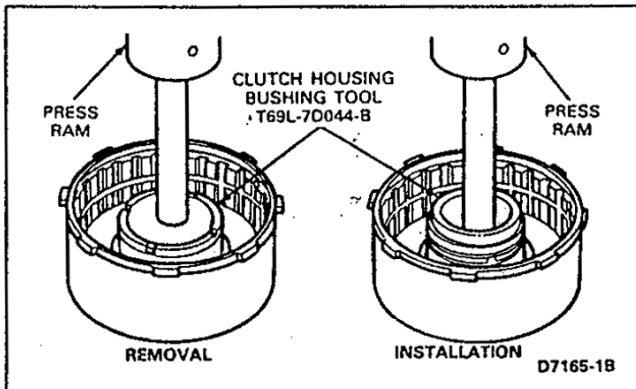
Replacing Reverse-High Clutch Rear Bushing
